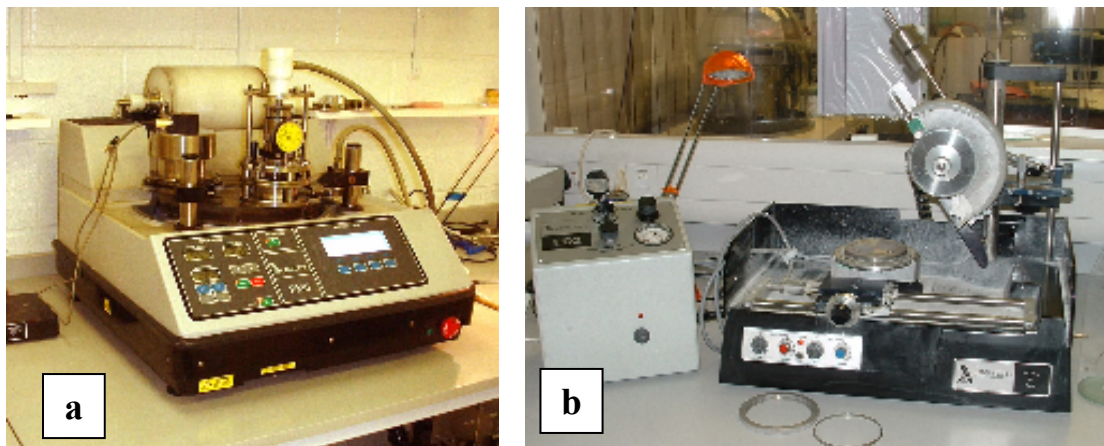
3: Photographs of (a) lapping machine and (b) dicing saw
